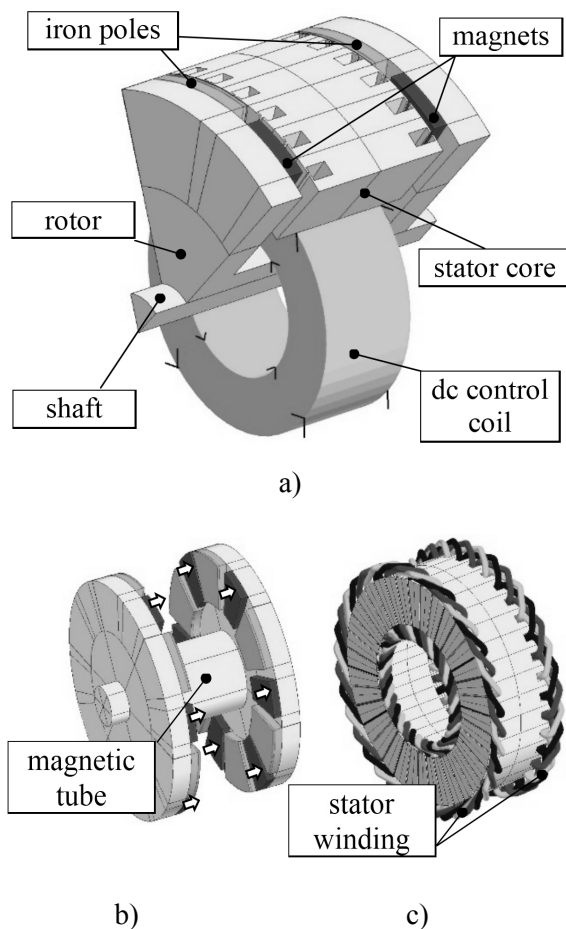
3D FEM model structure of FCAFPM machine –a); rotor parts –b); stator parts –c)
